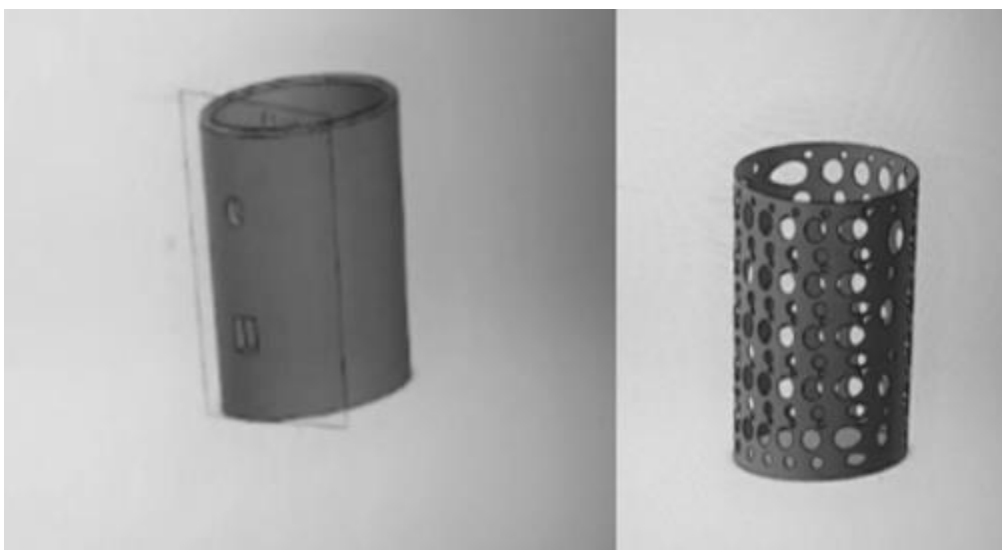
Design of the stove's outer casing and the perforated fuel-holder
